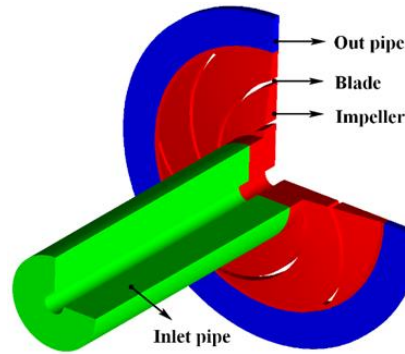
Three-dimensional model of the centrifugal pump impeller.
